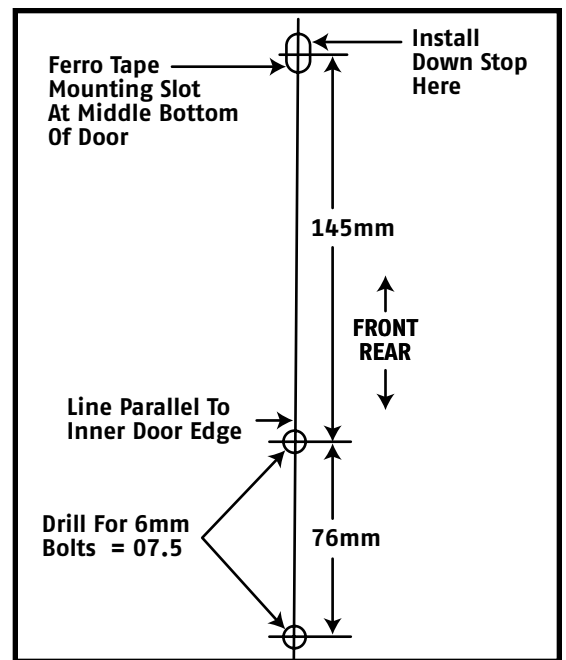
1984-86, 87 Coupe Drilling Dimensions
